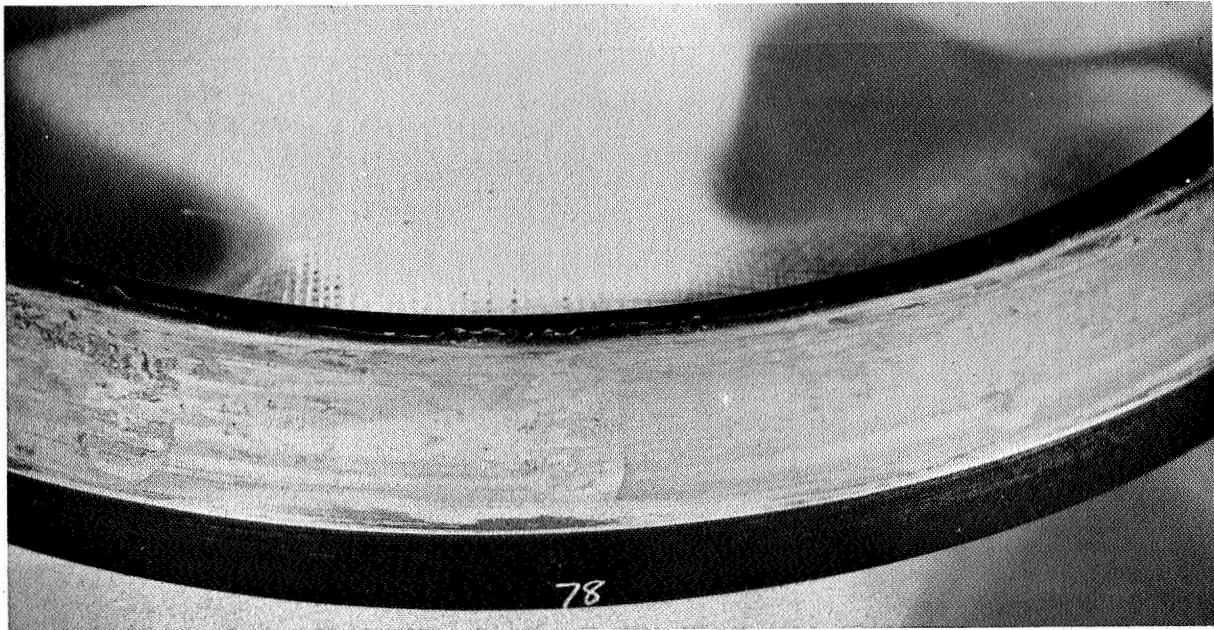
BEARING S/N 78. DAMAGED INNER RING.
